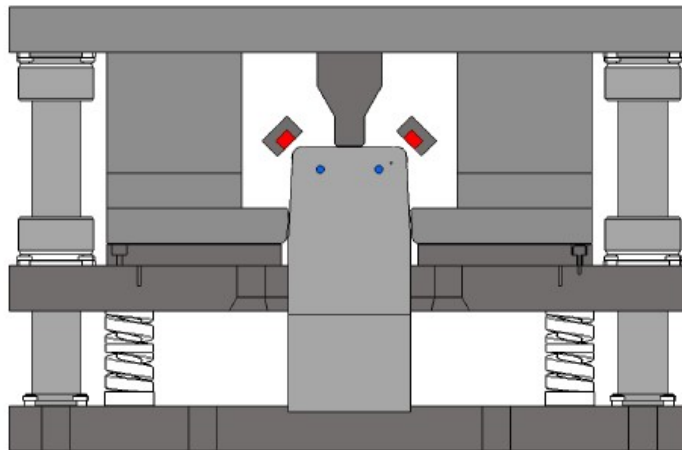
Schematic diagram of the induction heated tool for deep drawing
